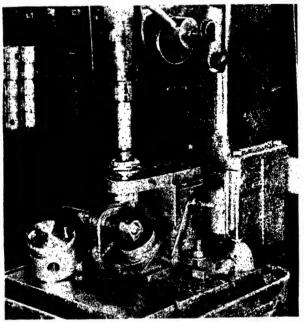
Fixture for holding a piston during the milling of the valve clearance spaces in the head.
